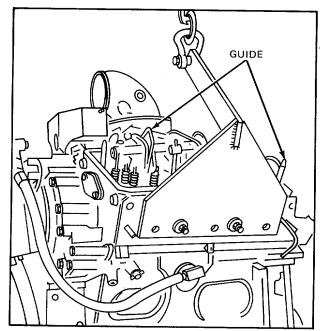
Lifting or Installing Cylinder Head with Tool J 22062-01
